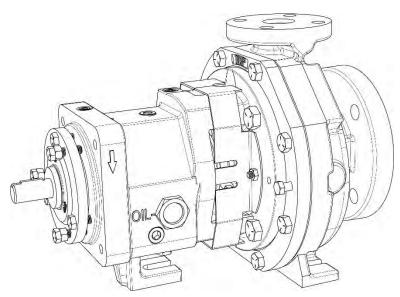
Guard installed using stuffing box to adaptor stud and nut
